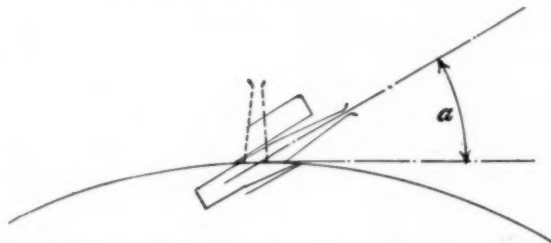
ANGULAR REVERSAL OF STEAM IN TERRY TURBINE BUCKET
